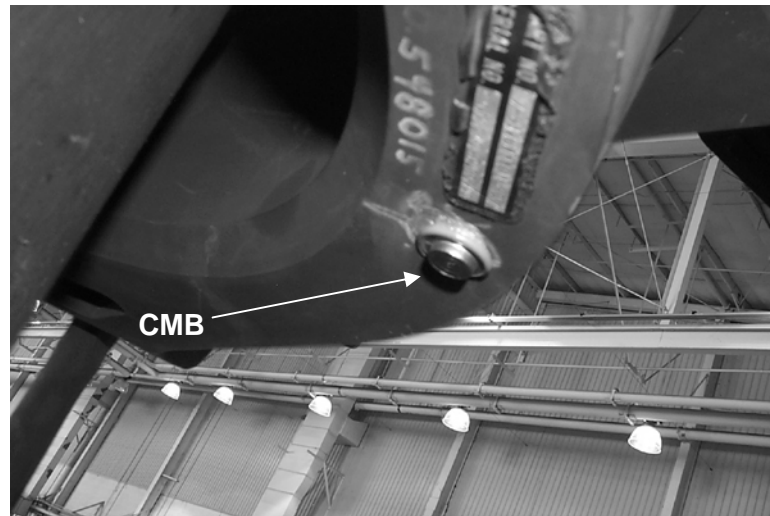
Main Rotor Swashplate Assembly (AH-64A/D) with CMB Installed
